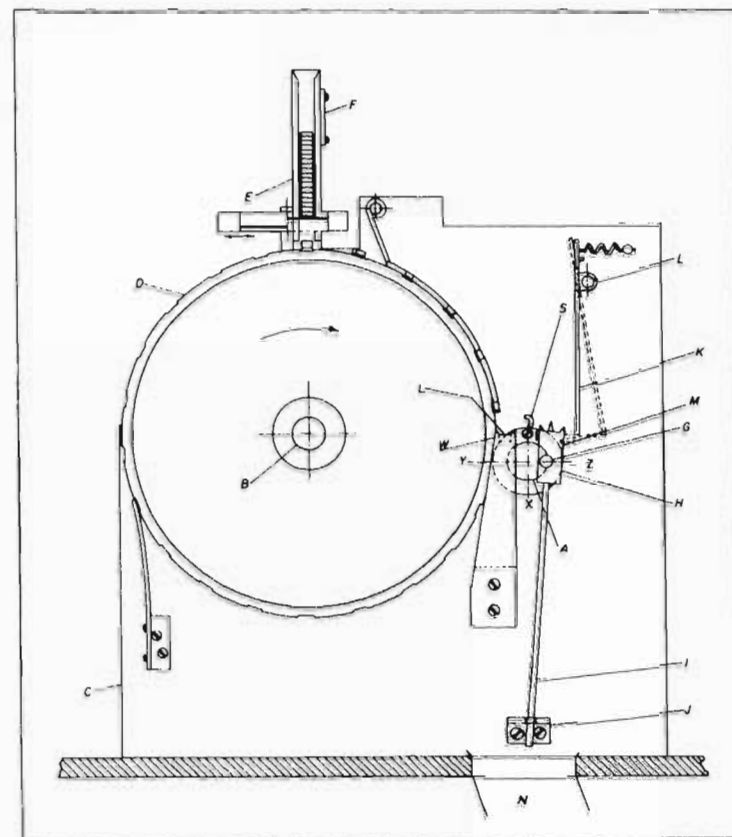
Positioning and assembly drum indexes by ratchet from shaft *A*. The riveting anvil is contacted with the pick-off *H* in *Z* position, as shown, but is not included in this diagram.
